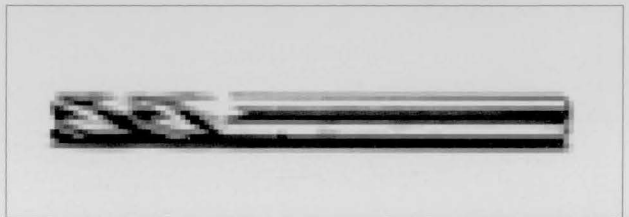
The prize winning LMD 3D printed cutting tool.
